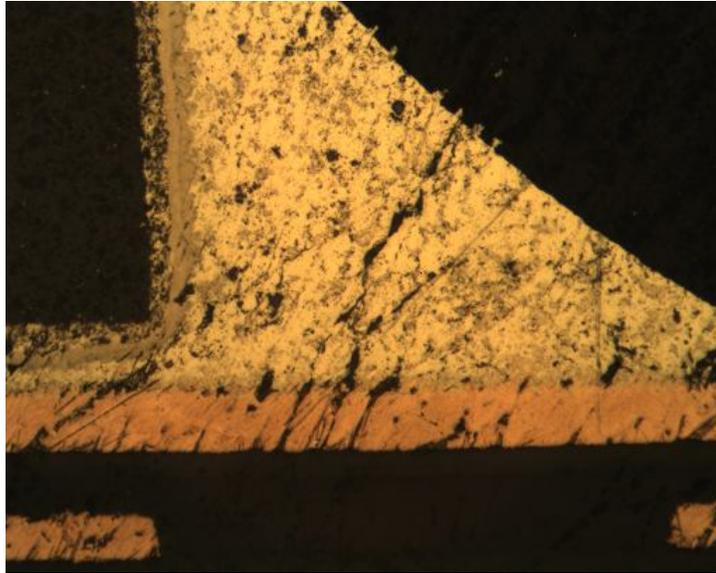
Epoxy Test Board on FR4 Substrate Solder Joint Crack, 1200 Cycles
